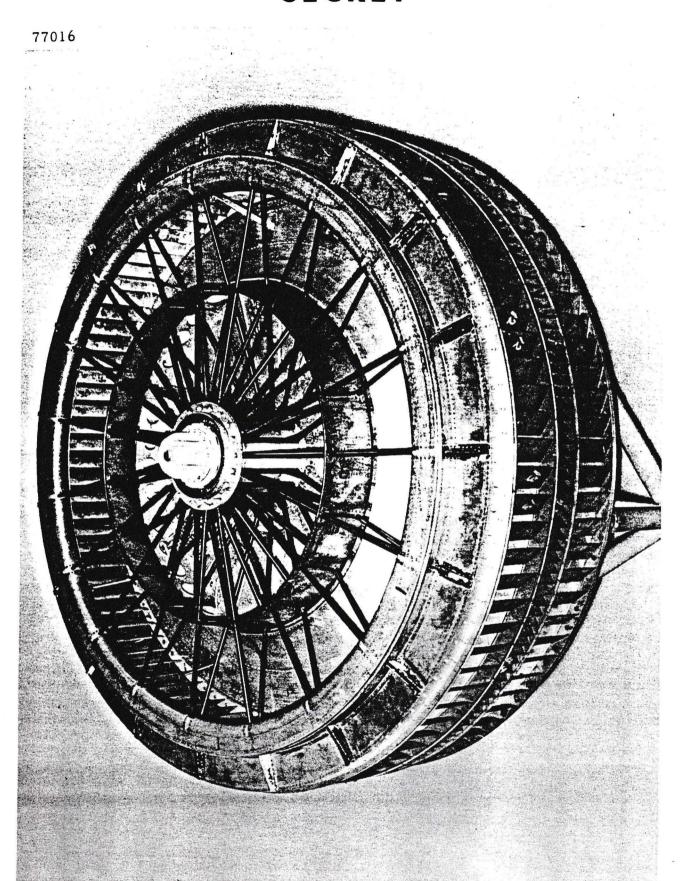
TURBINE AND COMPRESSOR ASSEMBLY
